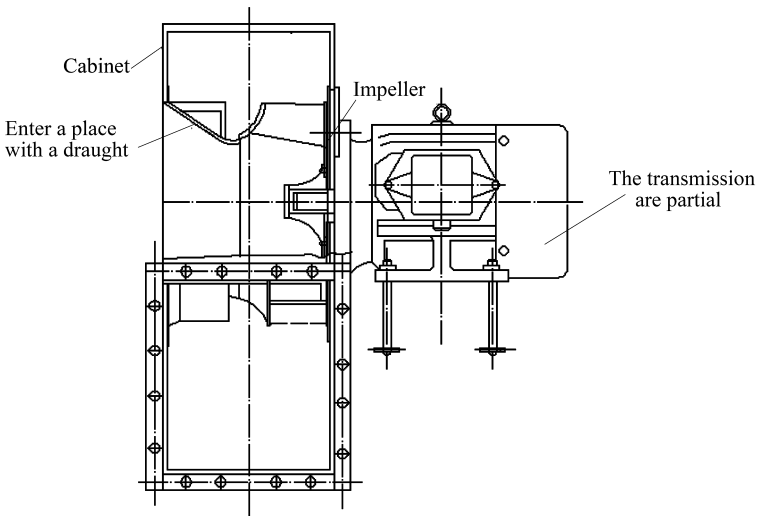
Multi-air flue crest clean machine structure schematic drawing
